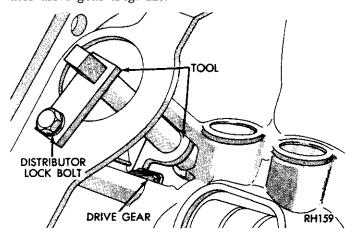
Camshaft Holding Tool C-3509 (Installed Position)
